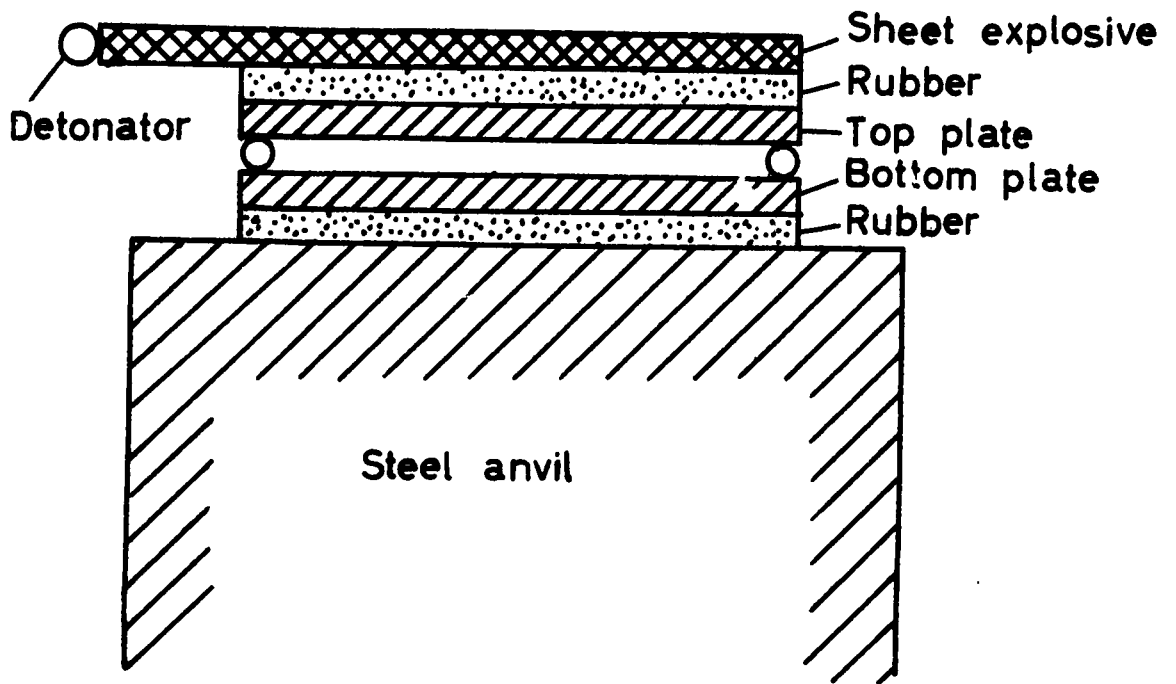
Experimental setup for explosive cladding with parallel plates.
